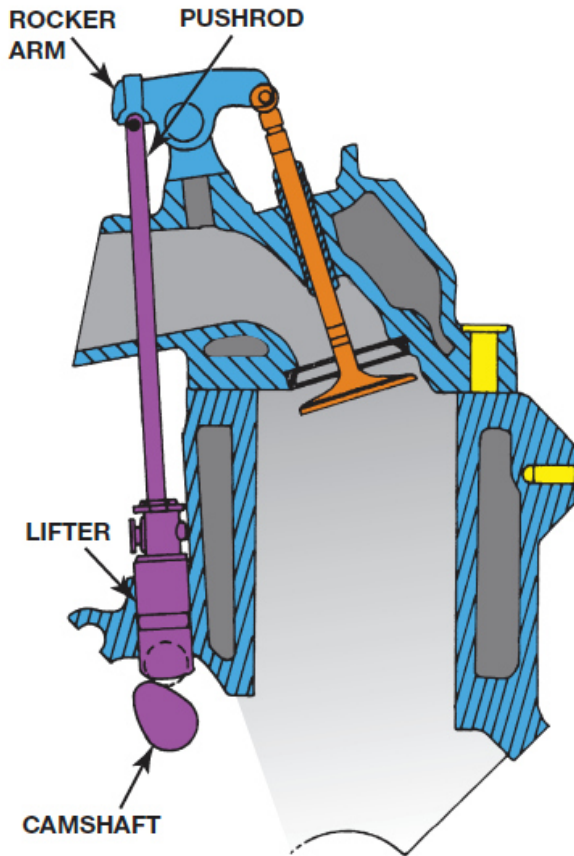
Overhead valve train, showing cam, lifter, pushrod, and rocker arm.
